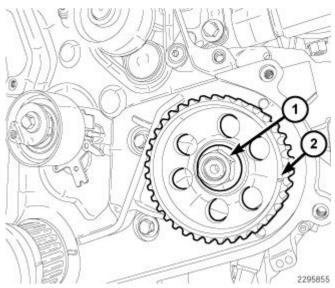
Oil Pump Cover Assembly Courtesy of CHRYSLER LLC
